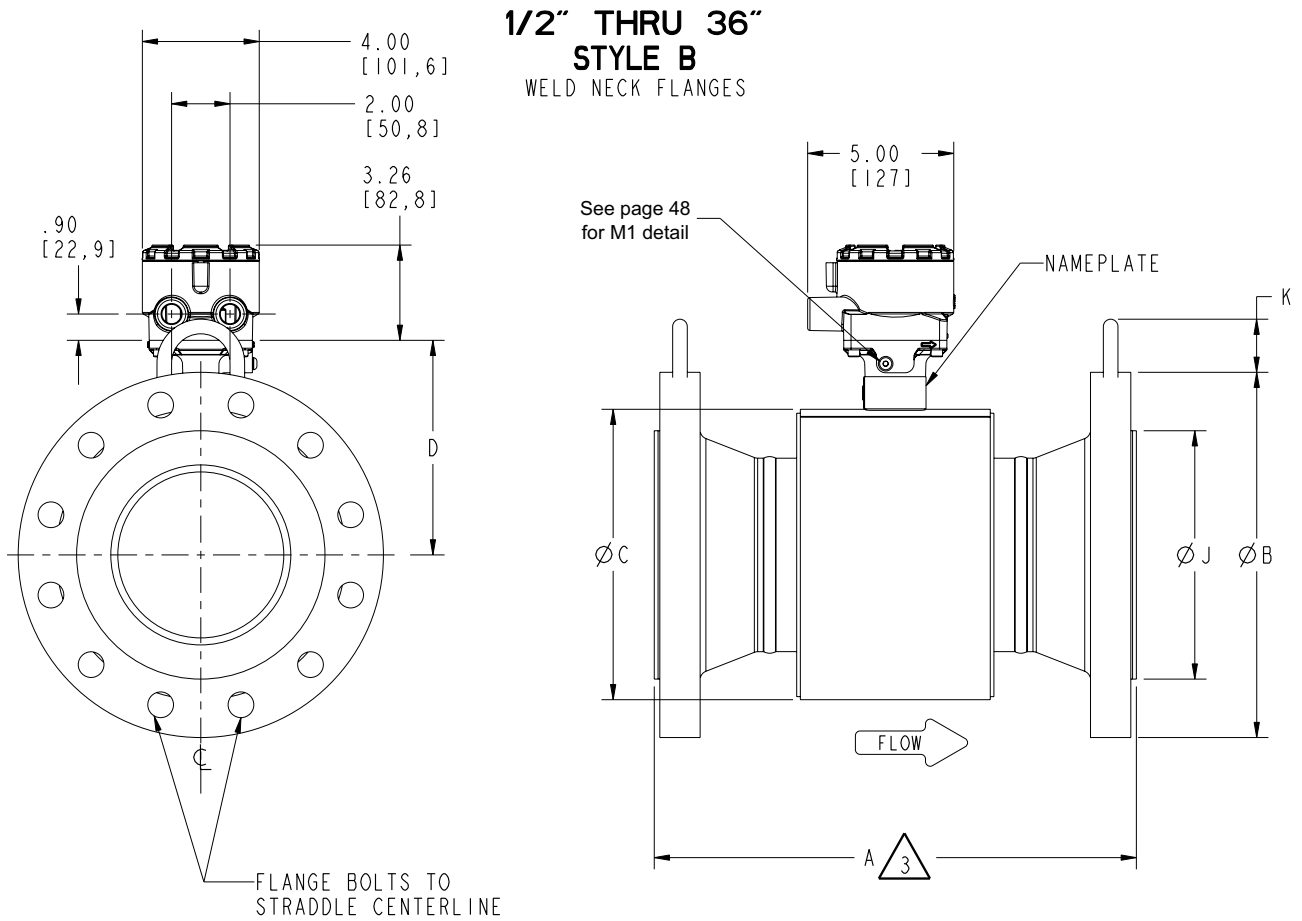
8705-M Flanged Sensor 1/2-in. to 36-in. (DN 15mm to 900mm) M2/M4 coil housing (P ≤ Class 600 derated)
